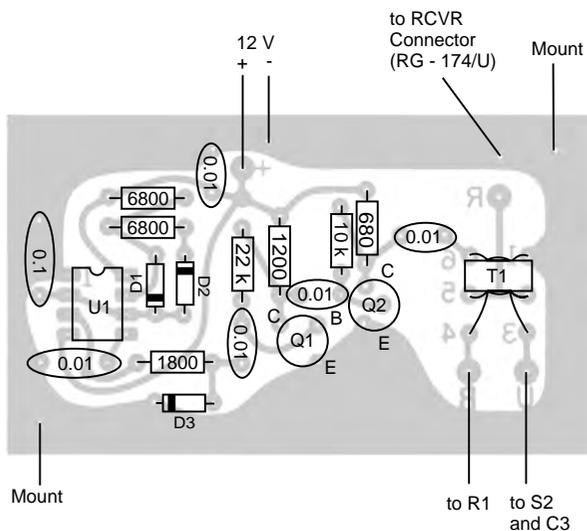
Parts-placement guide for the noise bridge as viewed from the component or top side of the board. Mounting holes are located in two corners of the board, as shown.
